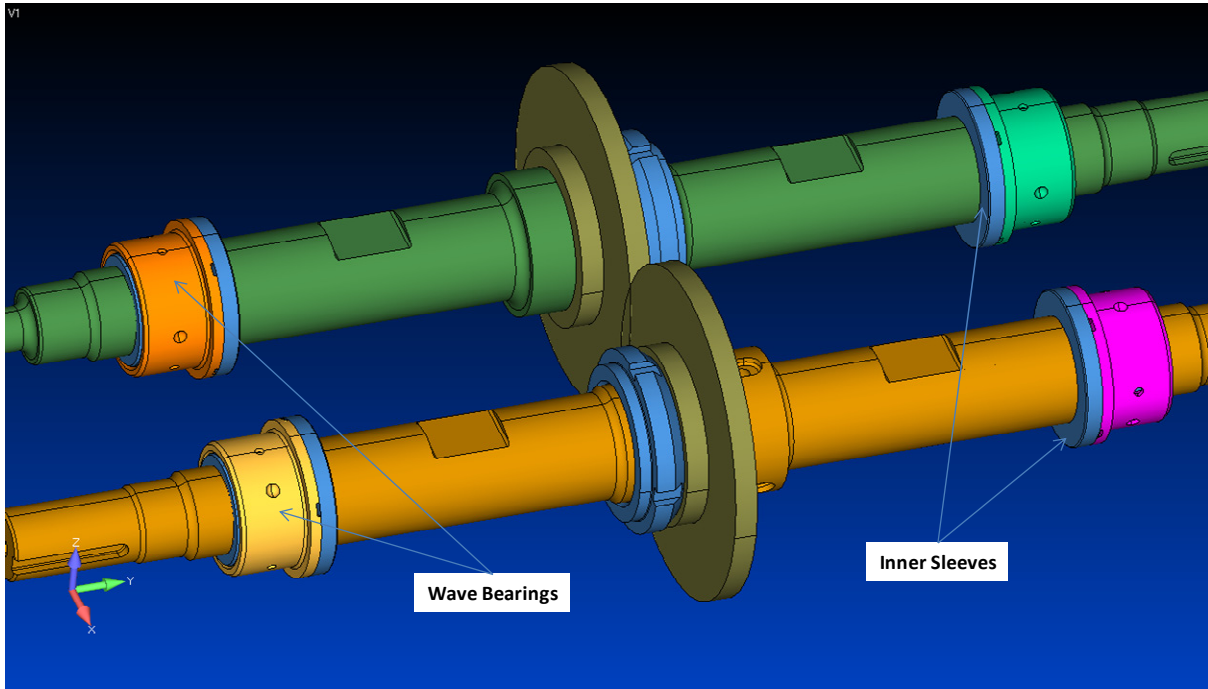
CAD image of the NASA GRC gearbox shafting shown with wave bearings.
